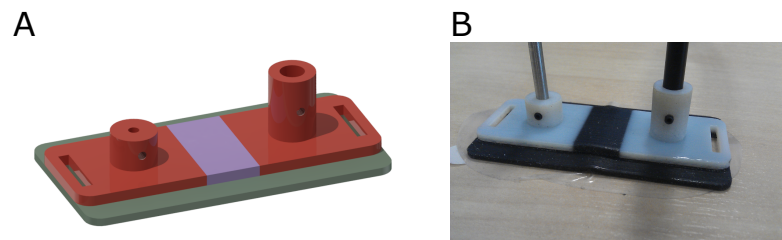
(A) 3D design of a single channel optode holder with a source detector separation of 30mm. (B) 3D printed version of design A. The white parts are a rigid hard plastic, while the black part is a softer, rubber-like material.
